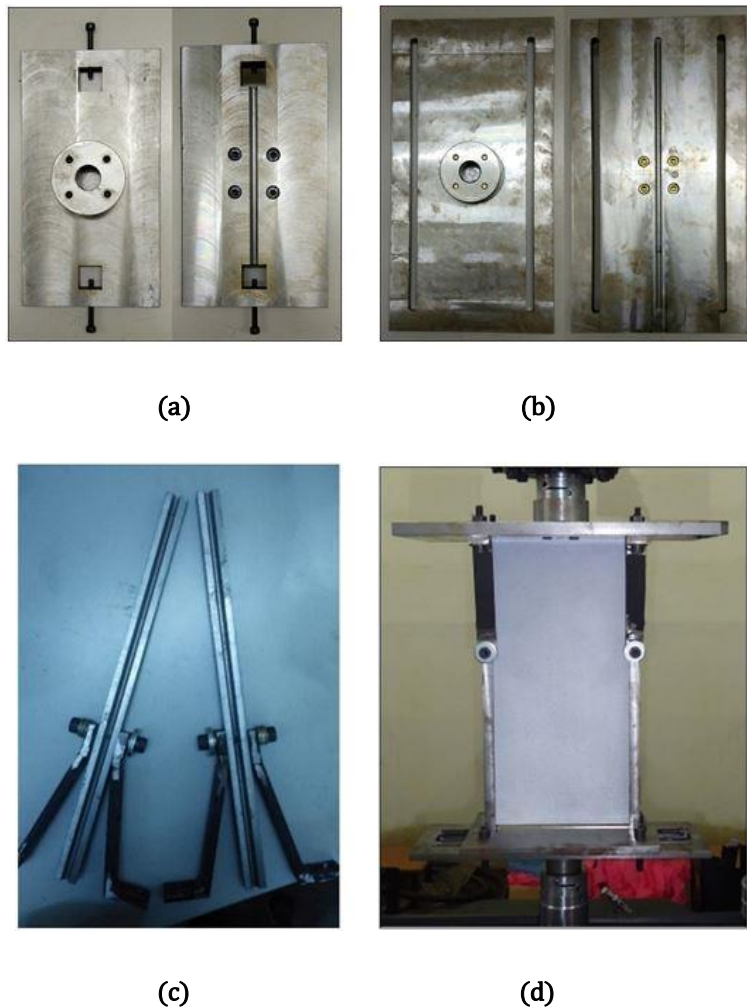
Fixture to provide simply supported boundary condition on all sides for buckling experiment (a) bottom plate (b) top plate (c) side supports (d) complete assembled fixture with buckling panel loaded.
